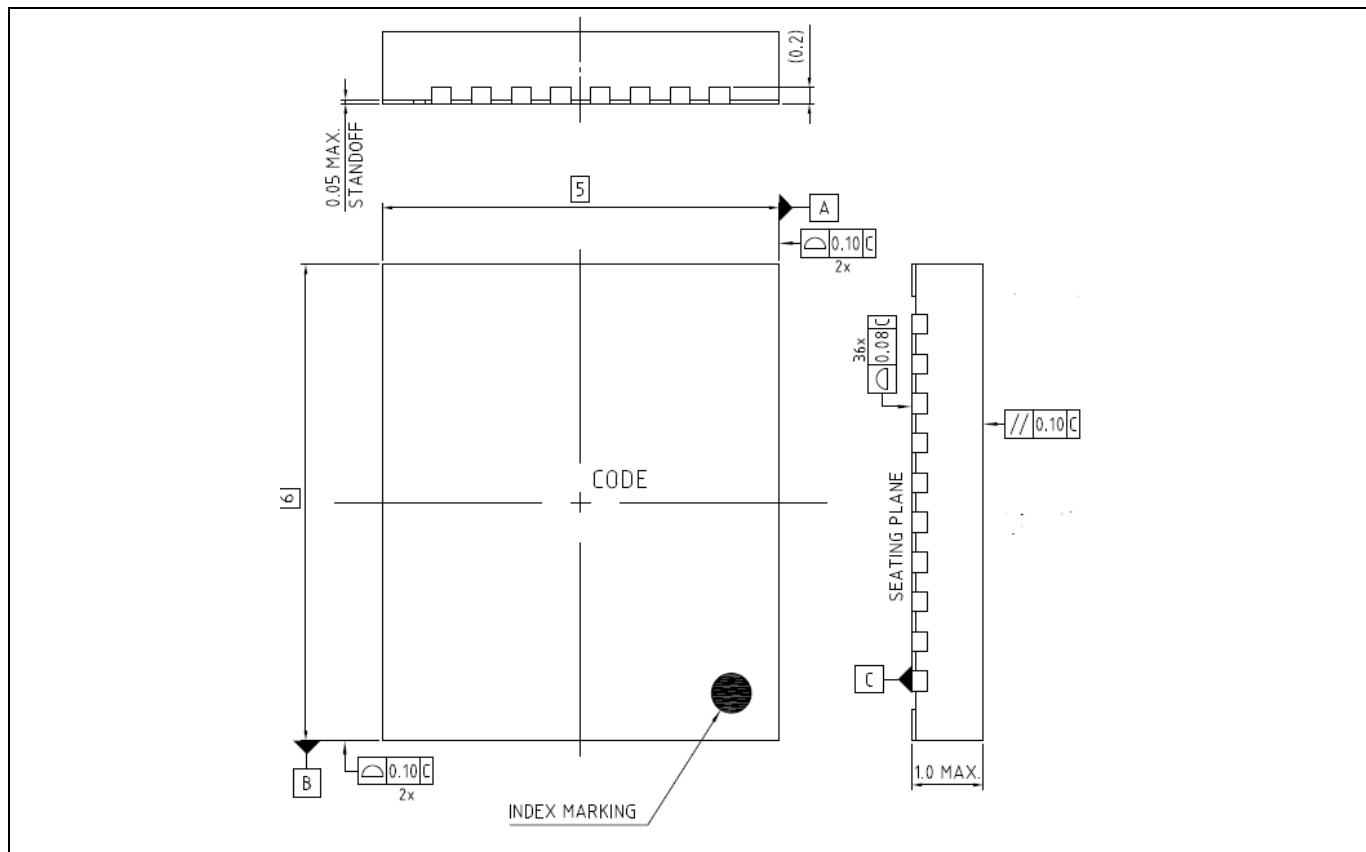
Mechanical Dimensions of Package (Top View and Side View) in mm
